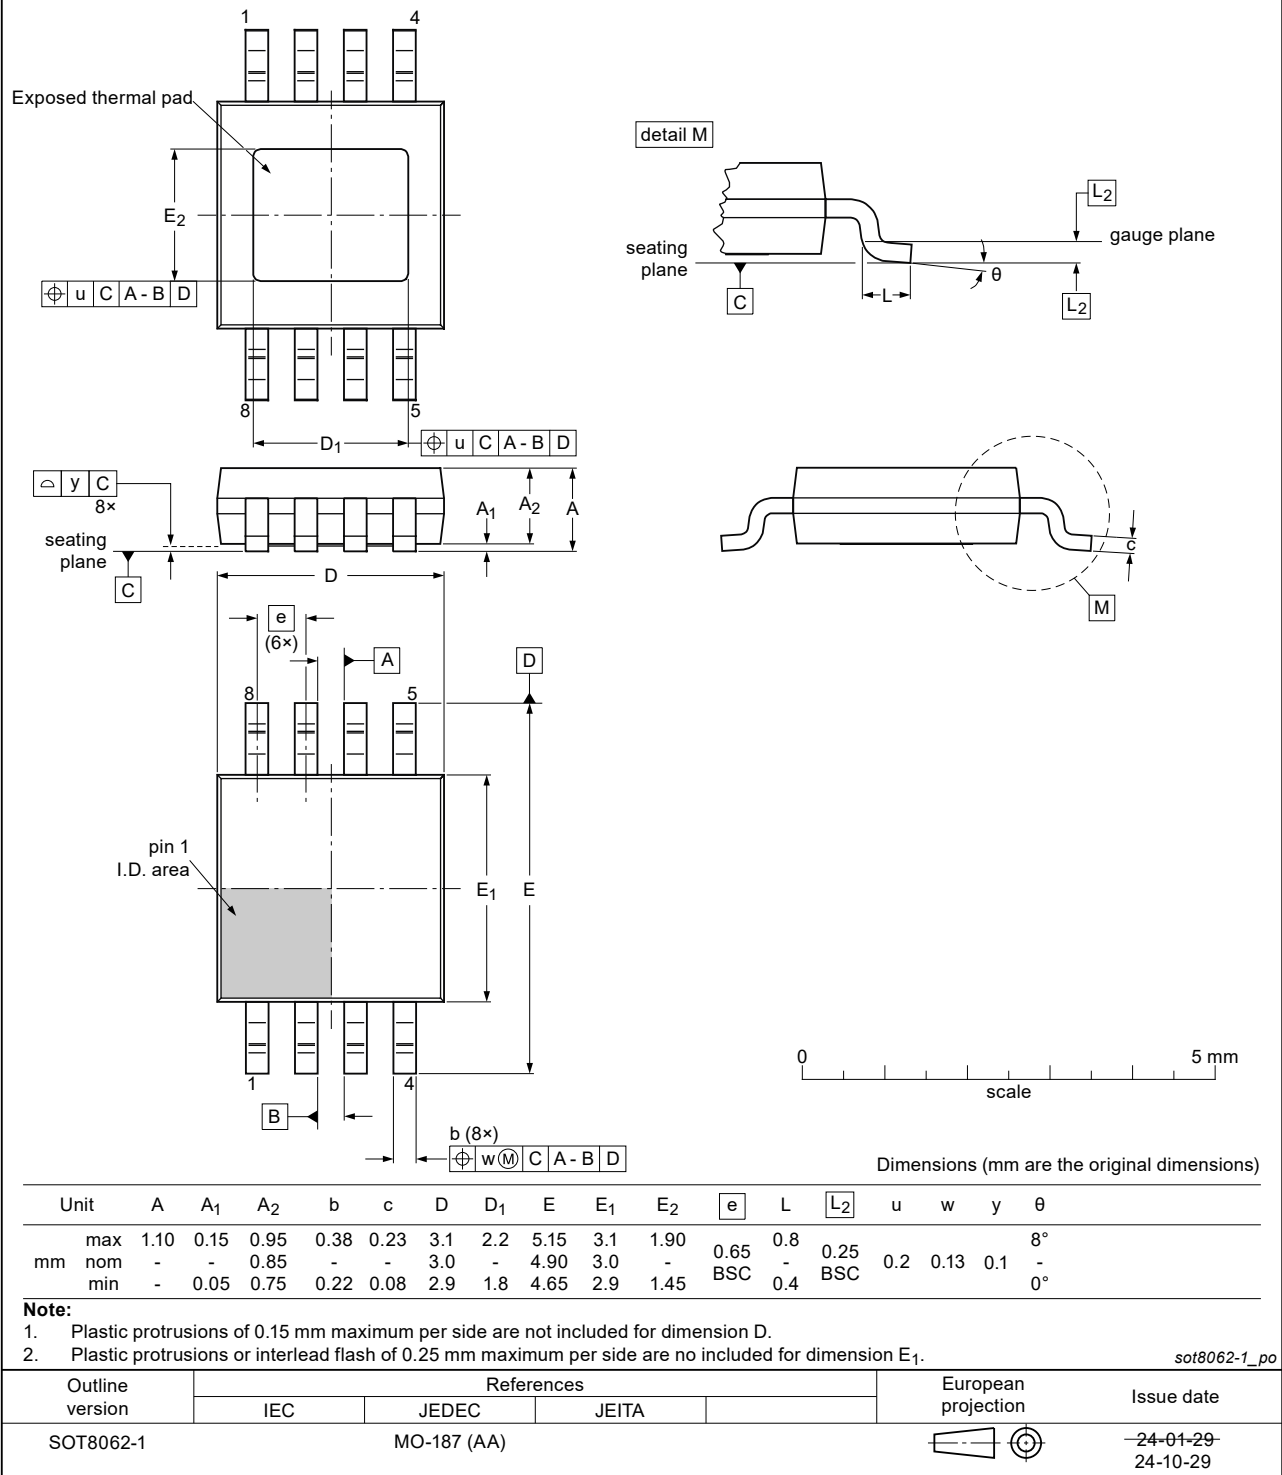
Package outline SOT8062-1 (HTSSOP8)
